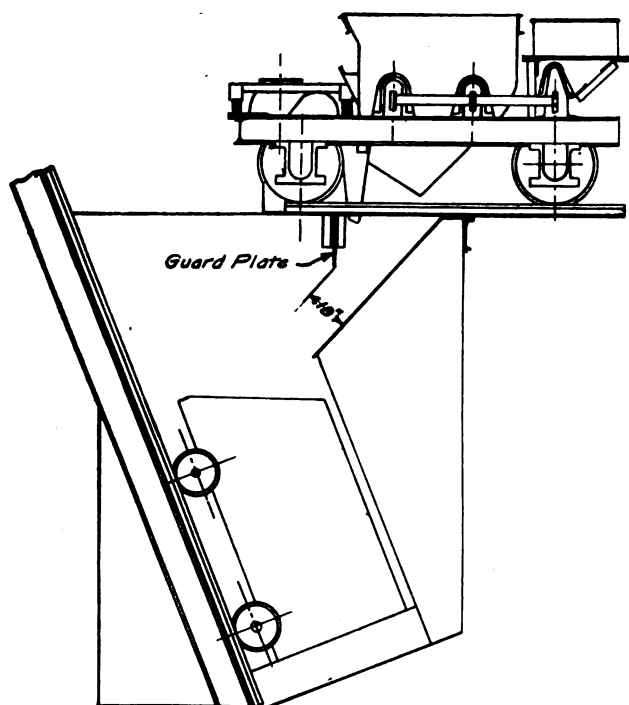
General arrangement of larry car showing guard plate in stock chute.
